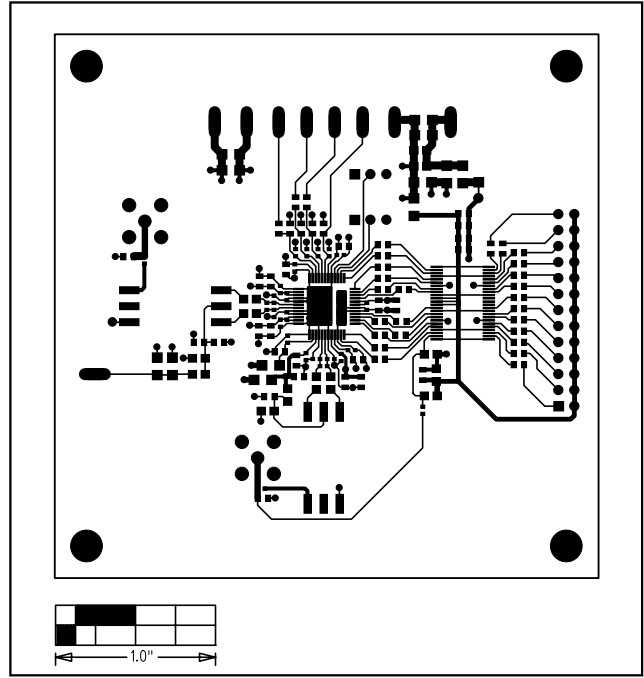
MAX1420 EV Kit PC Board Layout—Component Side
